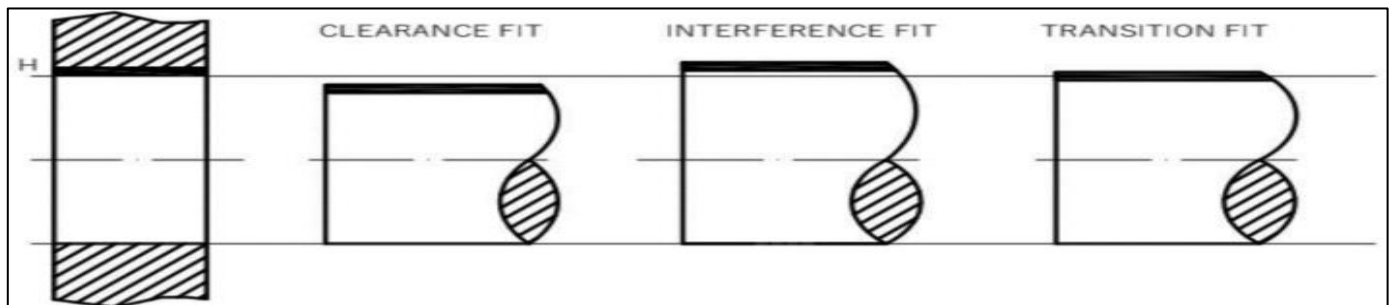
Various Types of Fits in a Hole-Shaft Assembly
